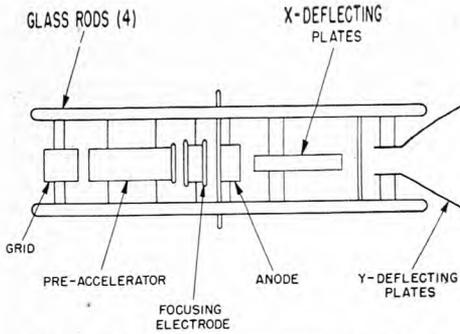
Electron-gun assembly of a typical Du Mont cathode-ray tube. The problem is to align the electrodes shown into a rigid assembly, holding close tolerances on spacing, angular alignment and parallelism
